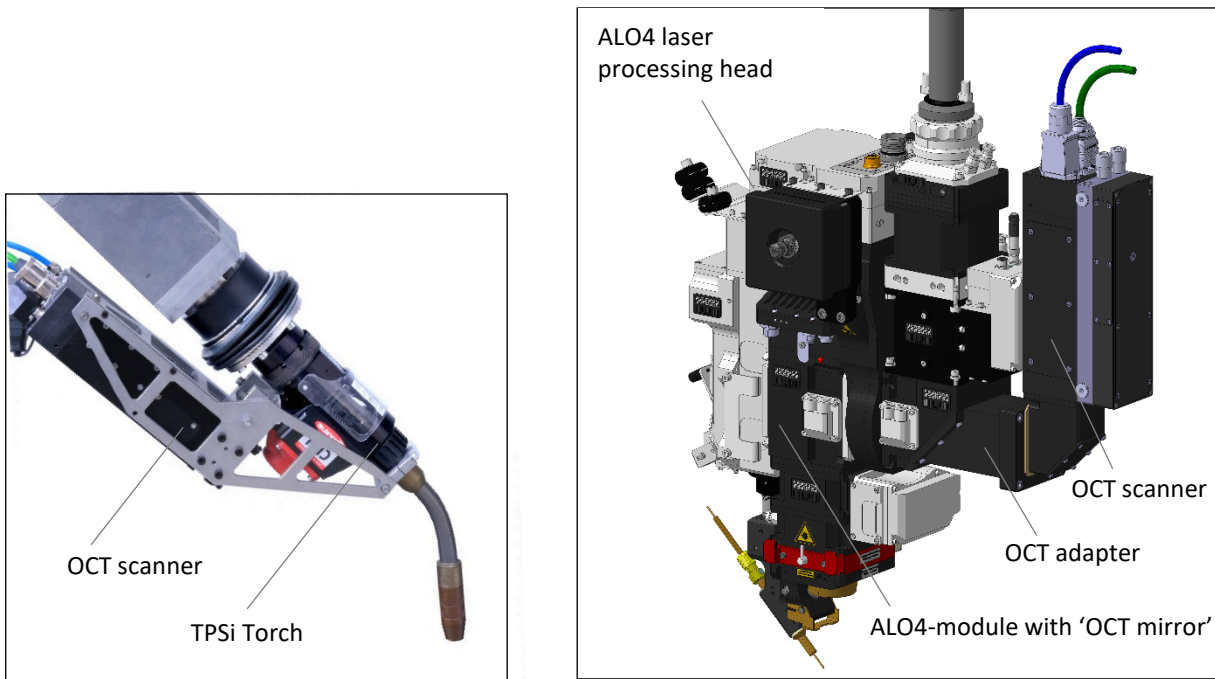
Traditional welding technique modernized with OCT: (a) TPSi torch for arc welding; (b) ALO4 laser processing head for tactile laser welding.
